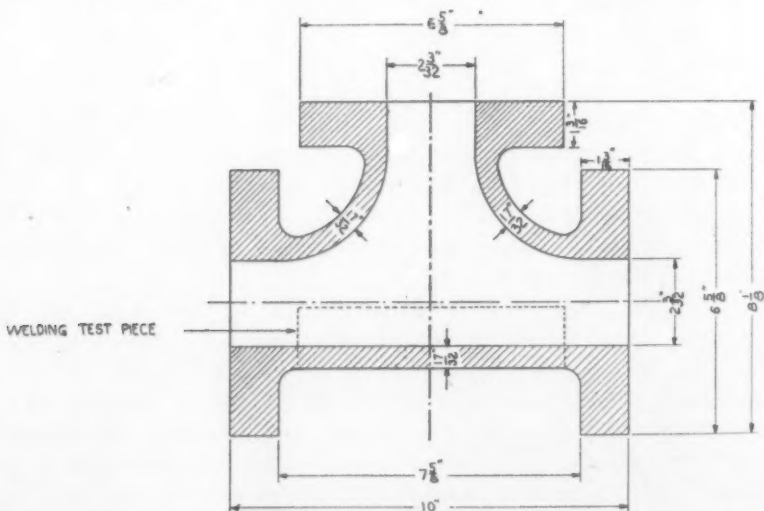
SECTIONAL VIEW OF 2-IN. SPECIAL FLANGED "TEE" EXPERIMENTAL CASTING (PATTERN DIMENSION).
